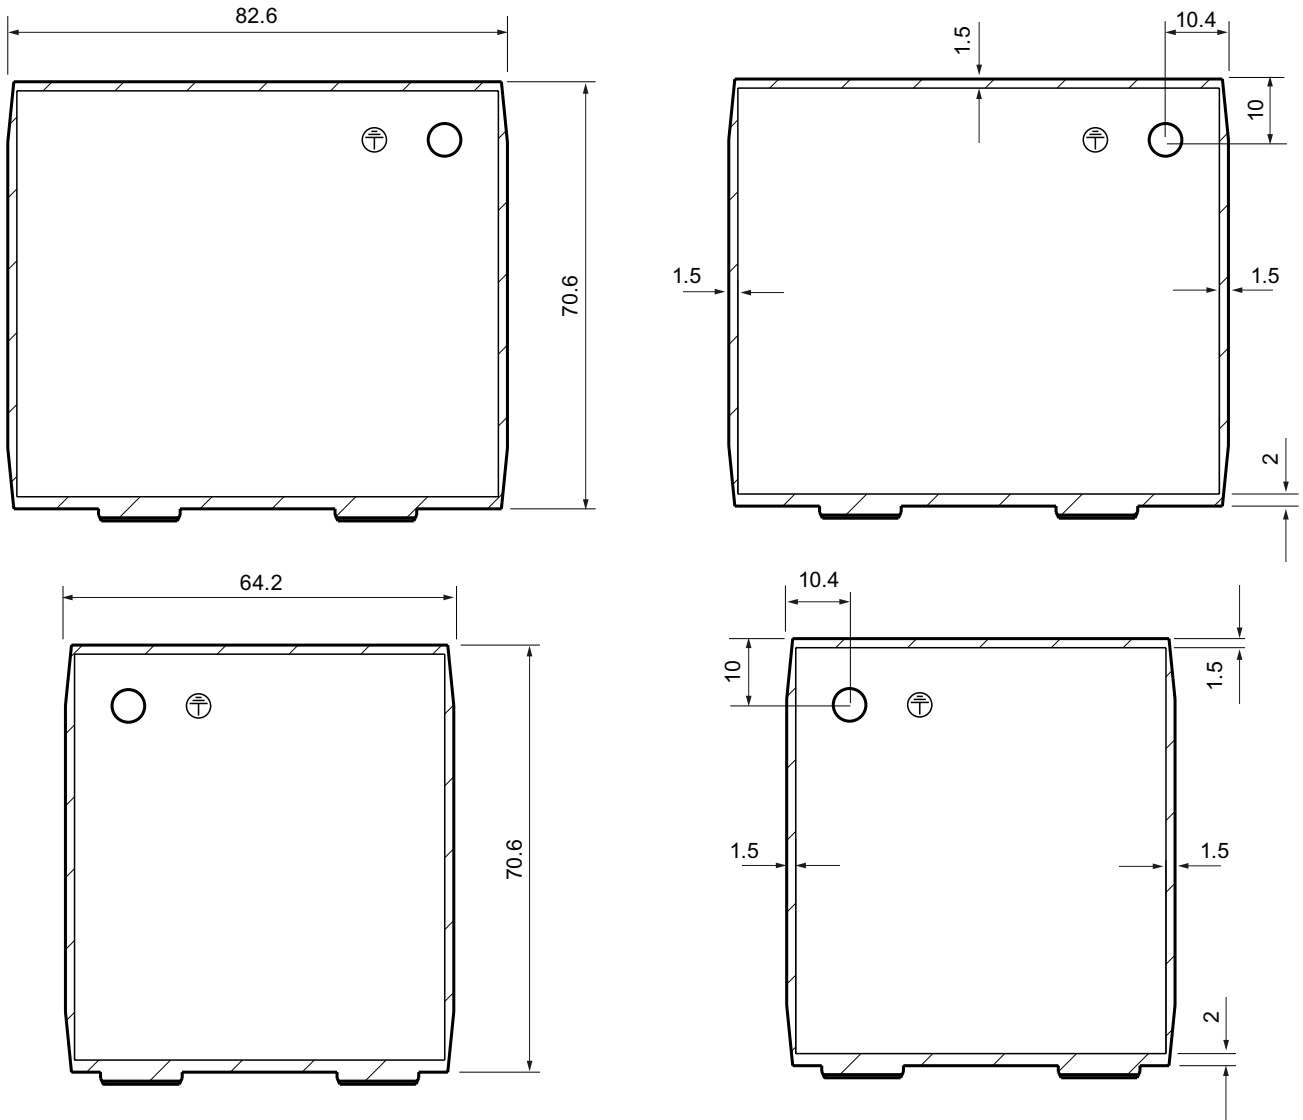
Dimensional drawings of shelves (dimensions in mm)
